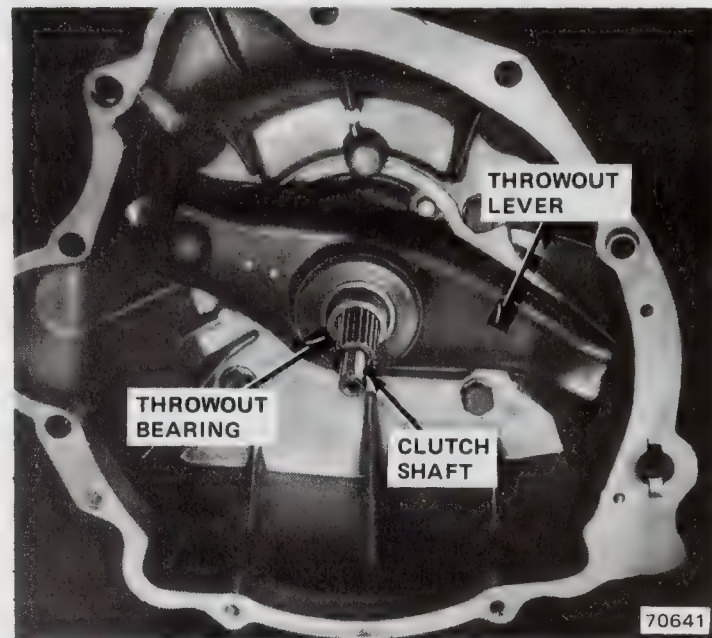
A-18 Throwout Bearing and Lever Arrangement
